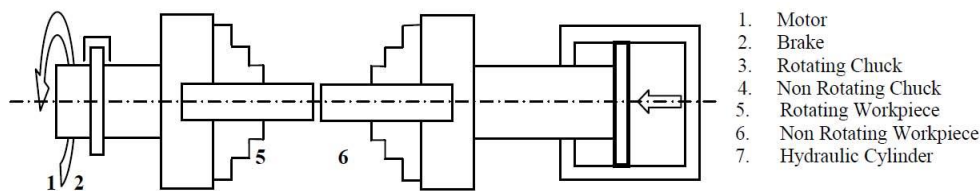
Layout of Continuous Drive Friction Welding [1]
